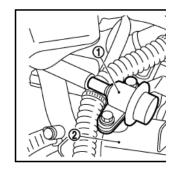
Identifying Fuel Feed Hose, Fuel Sub-Tube And Harness Courtesy of NISSAN MOTOR CO., U.S.A.
